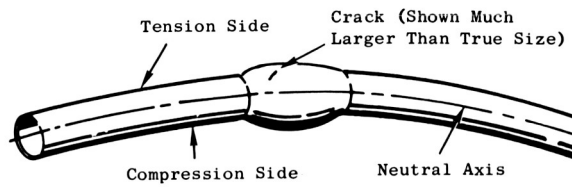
Sketch showing location of crack in weld nugget of T-111 alloy tube removed from corrosion test loop boiler.
